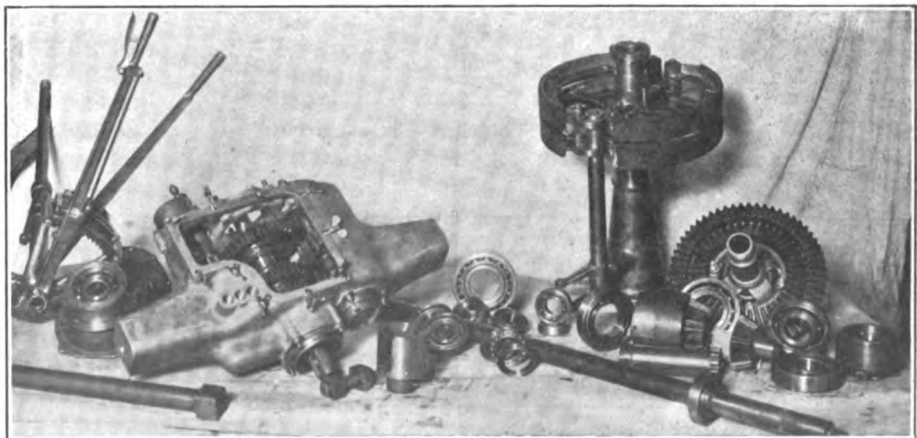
Gear box assembled and parts of rear construction. Note double-bevel wheel for fourth speed
